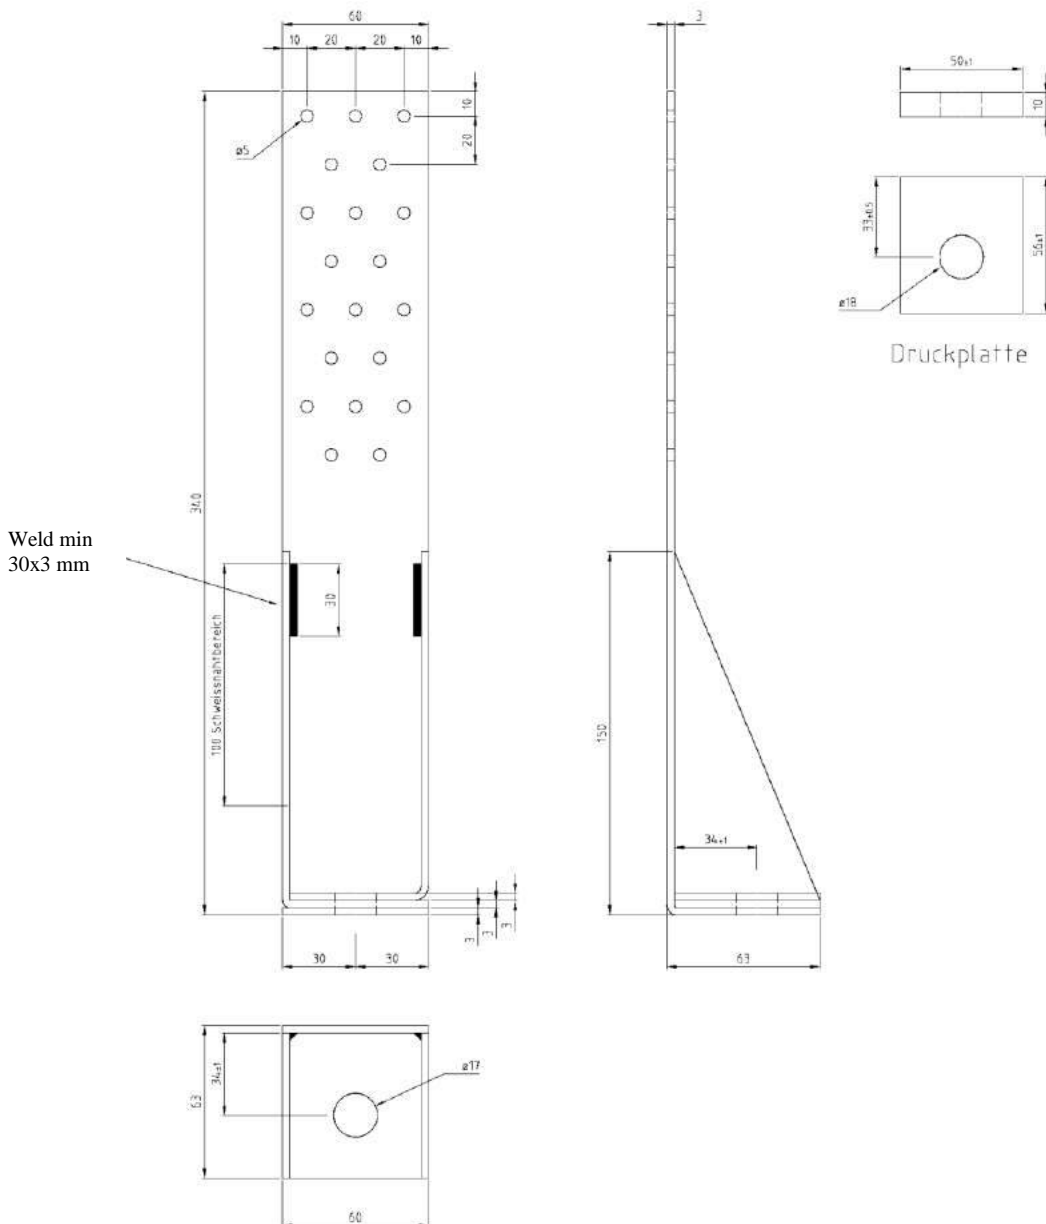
Dimensions of type WHT340 (drawing with washer 56x50x10)
